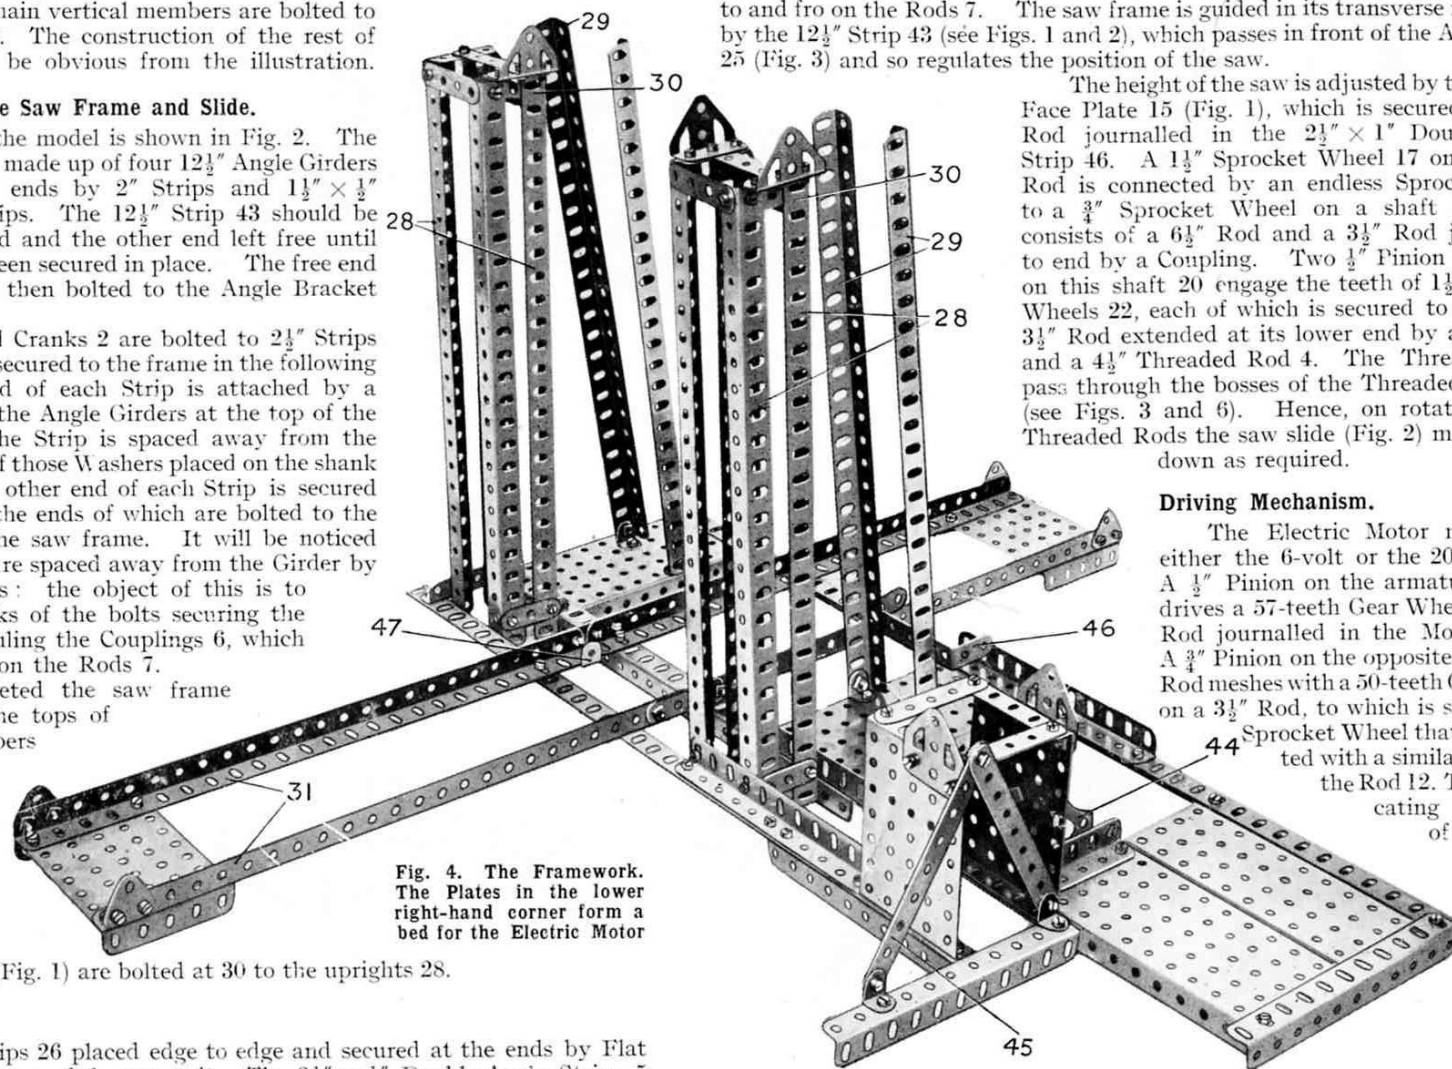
The Framework. The Plates in the lower right-hand corner form a bed for the Electric Motor
